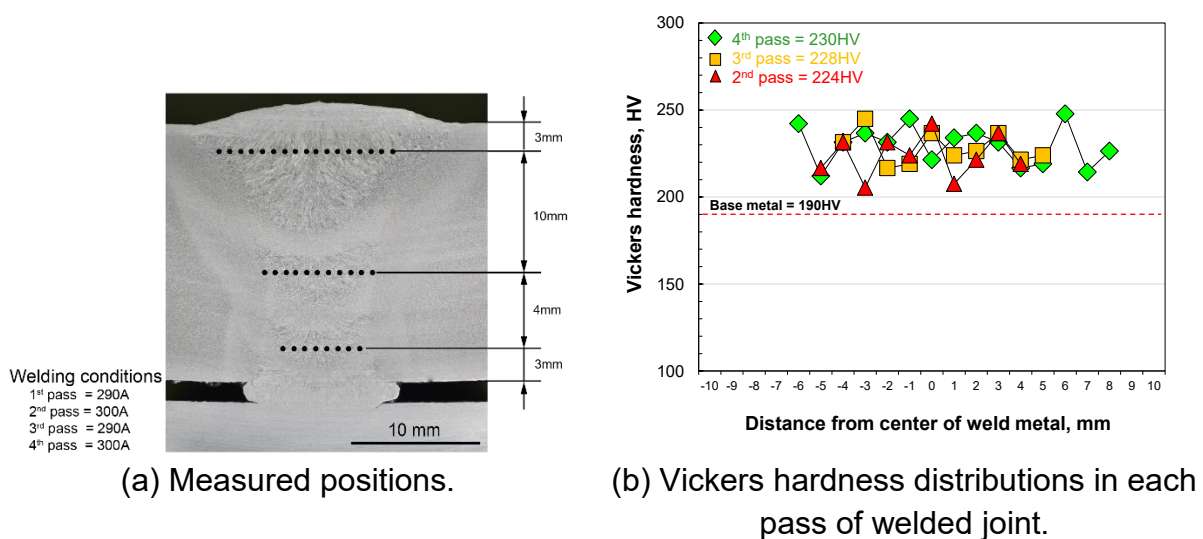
Vickers hardness measurement for conventional CO₂ arc welding.
